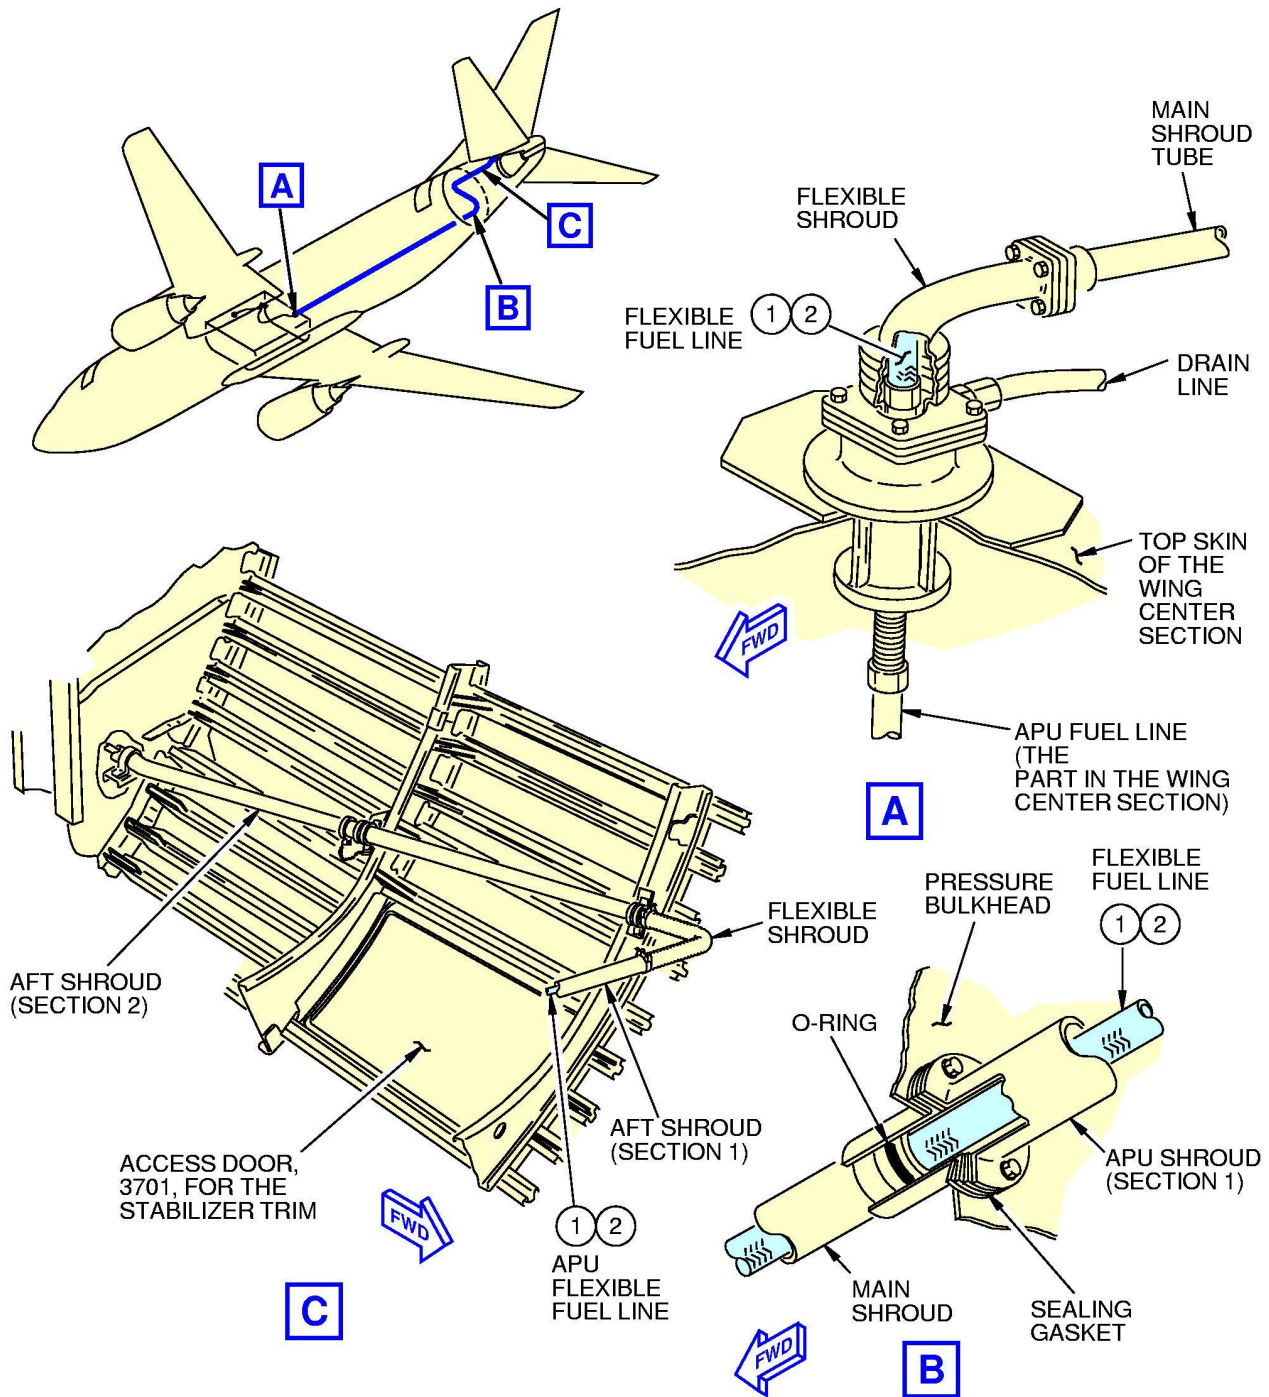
APU HOSE ASSEMBLY REPLACEMENT
